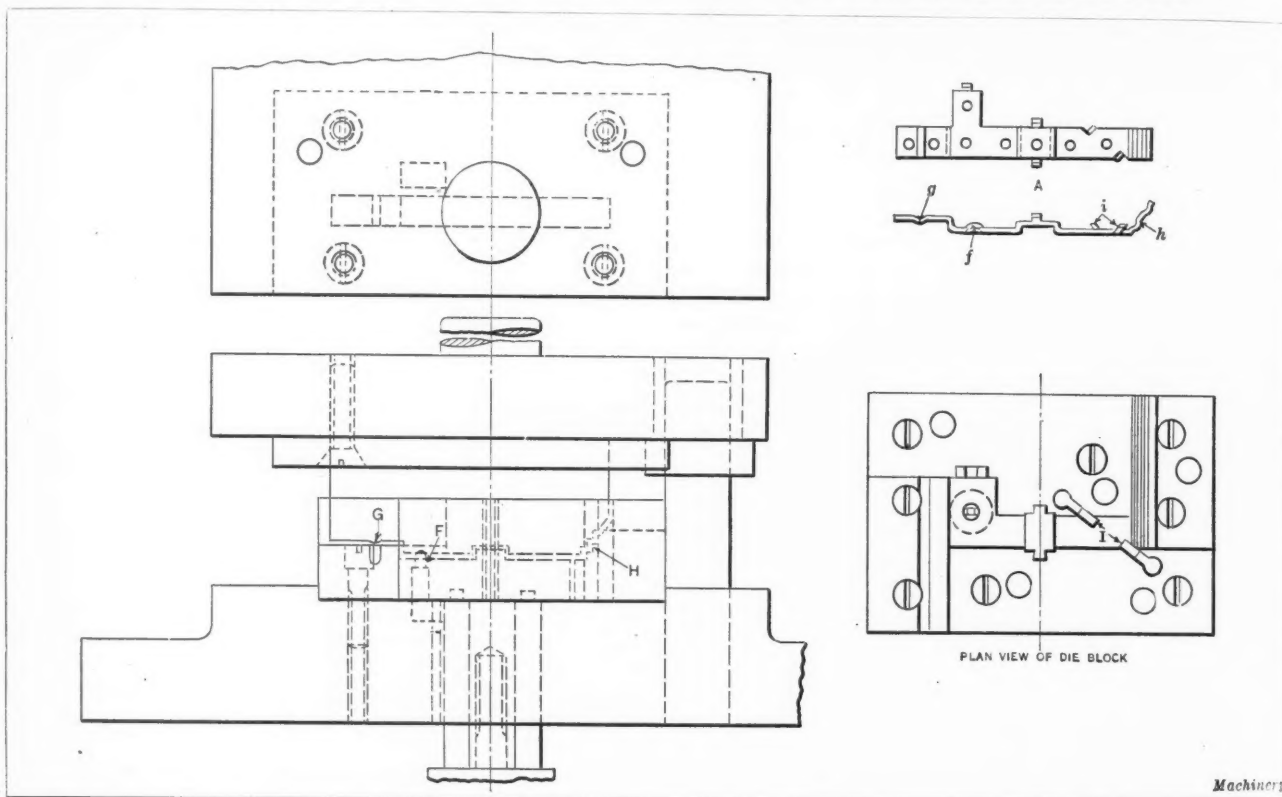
Die Set used for crimping, bending, and otherwise forming the Piece shown in the Lower Part of Fig. 1
